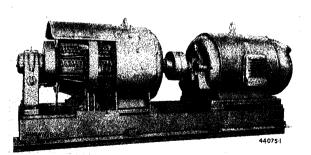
Multi-site welding converter. Generator 4000 A, constant voltage 40 or 50 or 60 V, 1500 r.p.m. Motor 500 V, 50 cycles, 265 kW.
